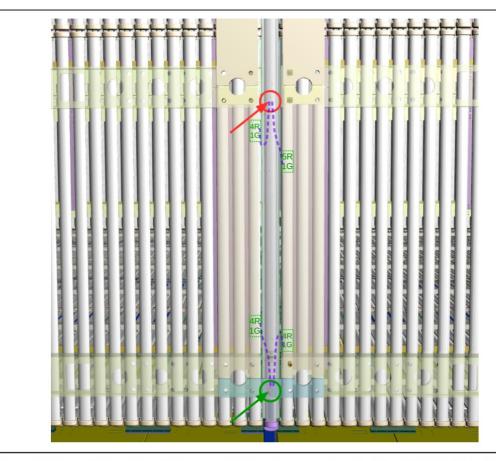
Perspective view of lower part of upstream endwalls, from DUNE-13 as found in DUNE-doc-1870-v5, viewed from outside looking downstream. The CPA edge profile and some endwall structures have been made semi-transparent to allow the CPA frame and adjacent endwall profiles to be seen. A circle and arrow mark the locations where the HV bus connector blocks should be, and dashed purple lines show possible paths of the wires to the HV-to-EW boards. The wires must be totally contained inside the field cage.
